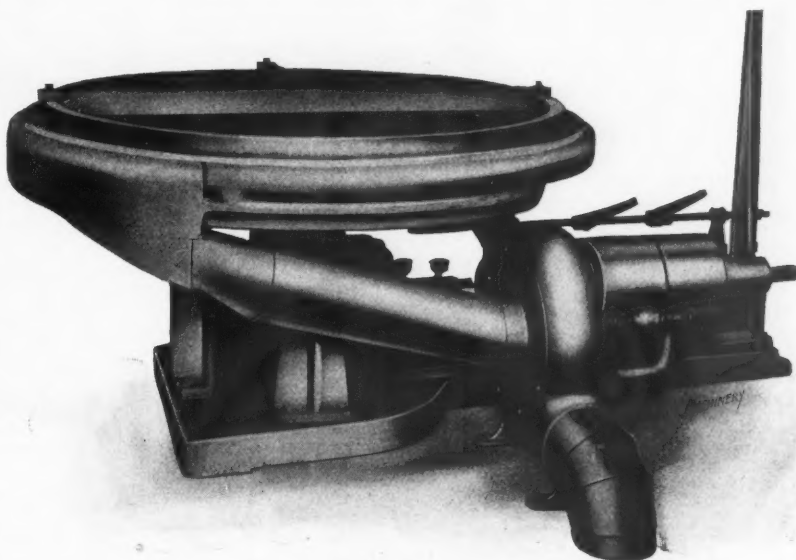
Rear View of Vertical Disk Grinder, showing Exhaust System
